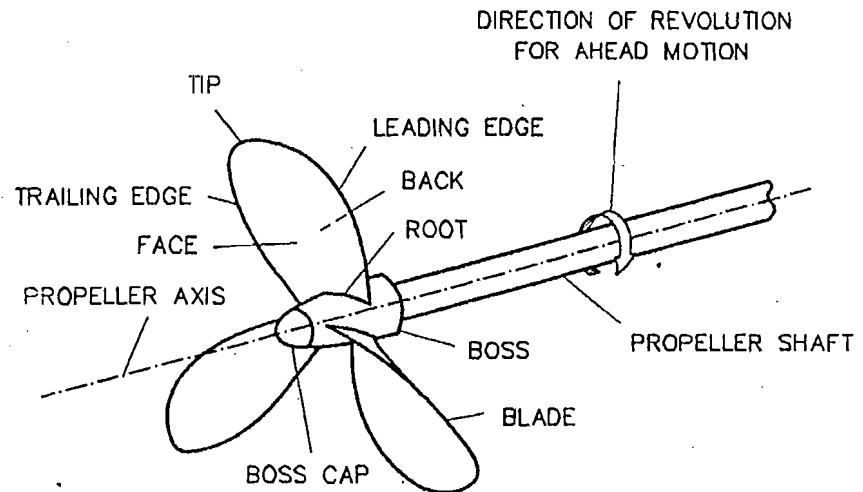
A Three-Bladed Right Hand Propeller.
